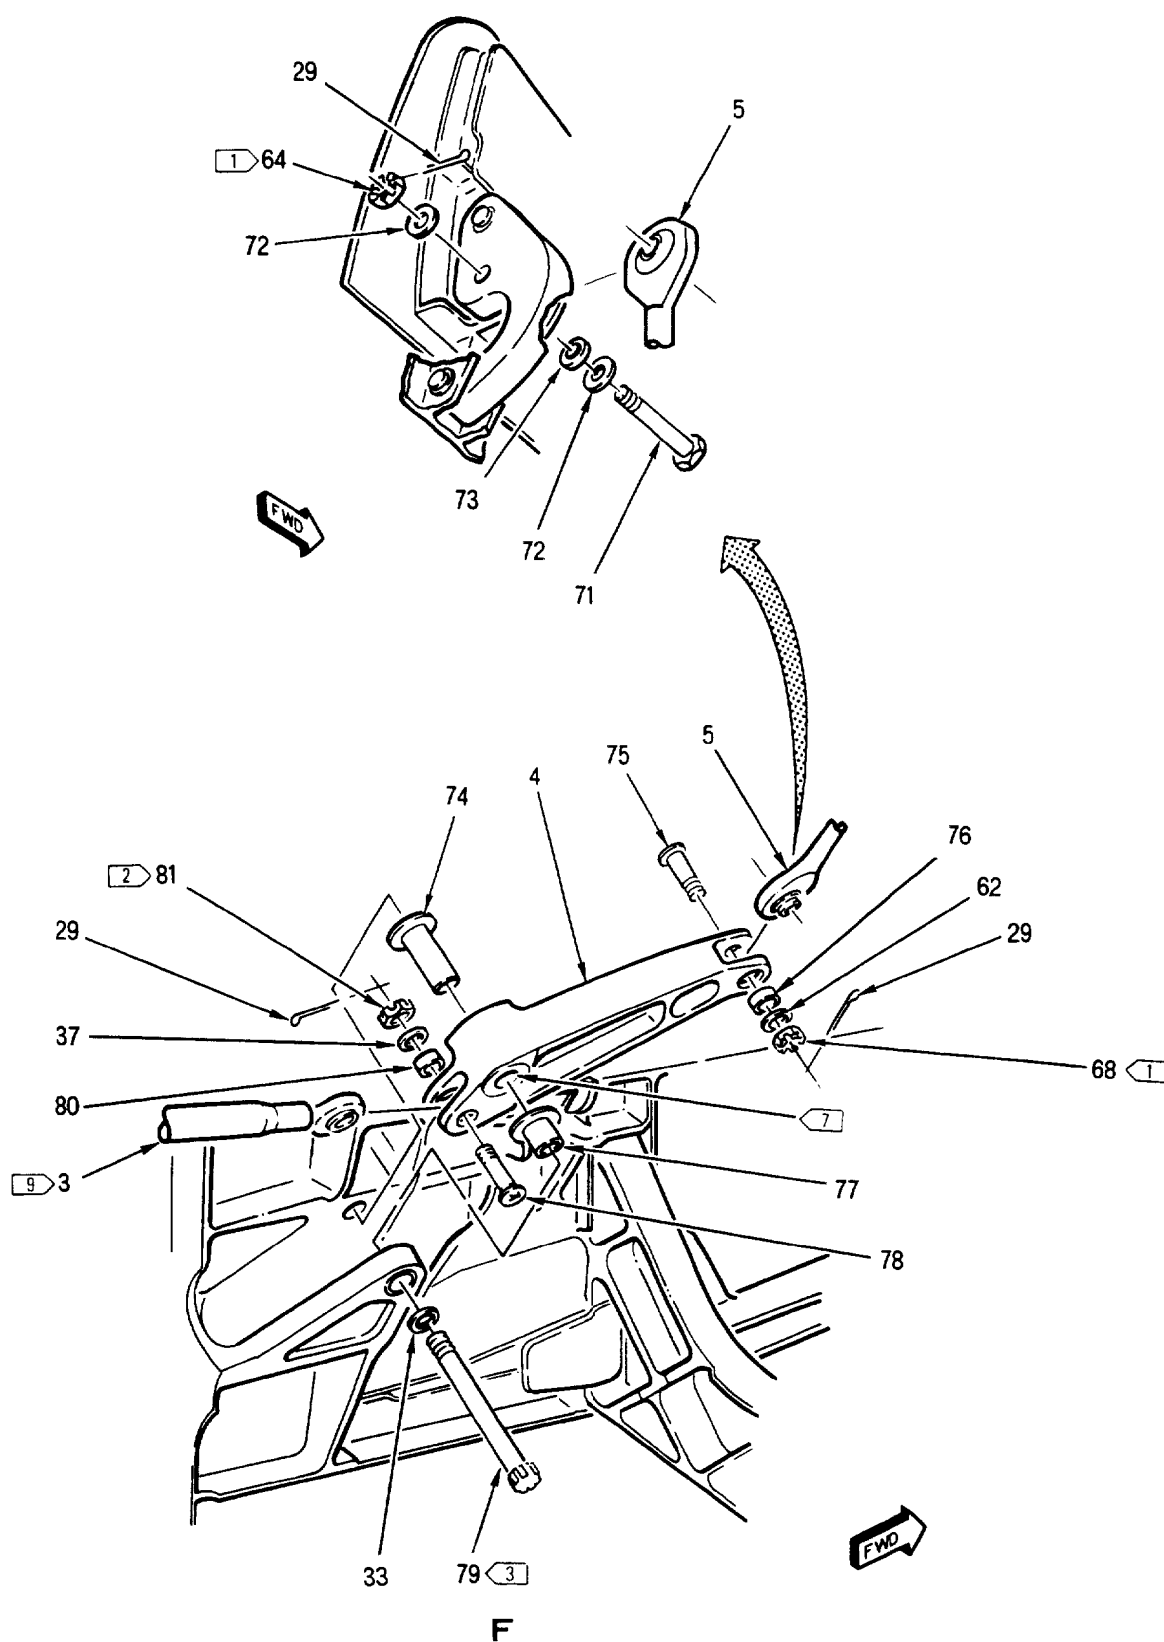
Inflight Refueling Probe and Door Drive Mechanism (Sheet 8)
